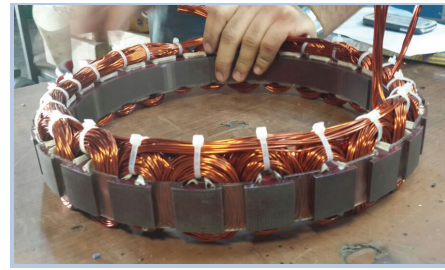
Manufactured stator of 6 kW BLDC motor.
